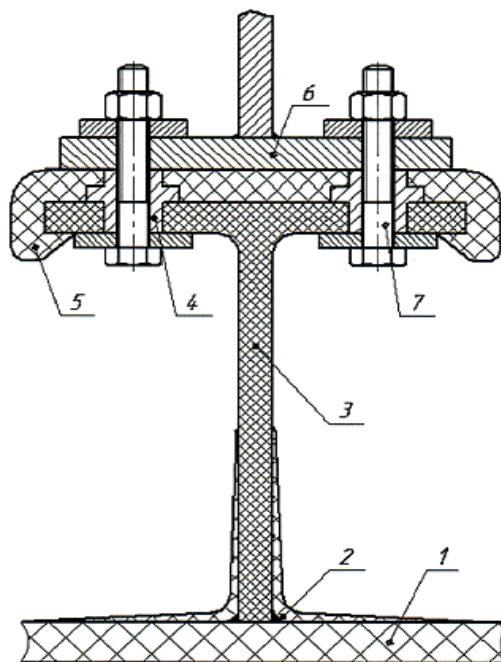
Joint of a support element of an engine (equipment) to the seating T-shaped section with moulded bushes:
